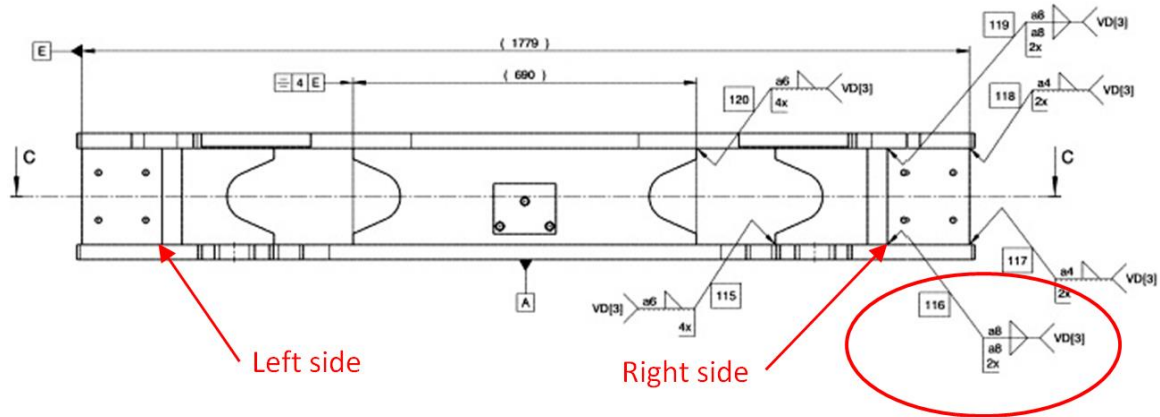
Example of drawing requirements for weld no 116 which in total creates four welds.
